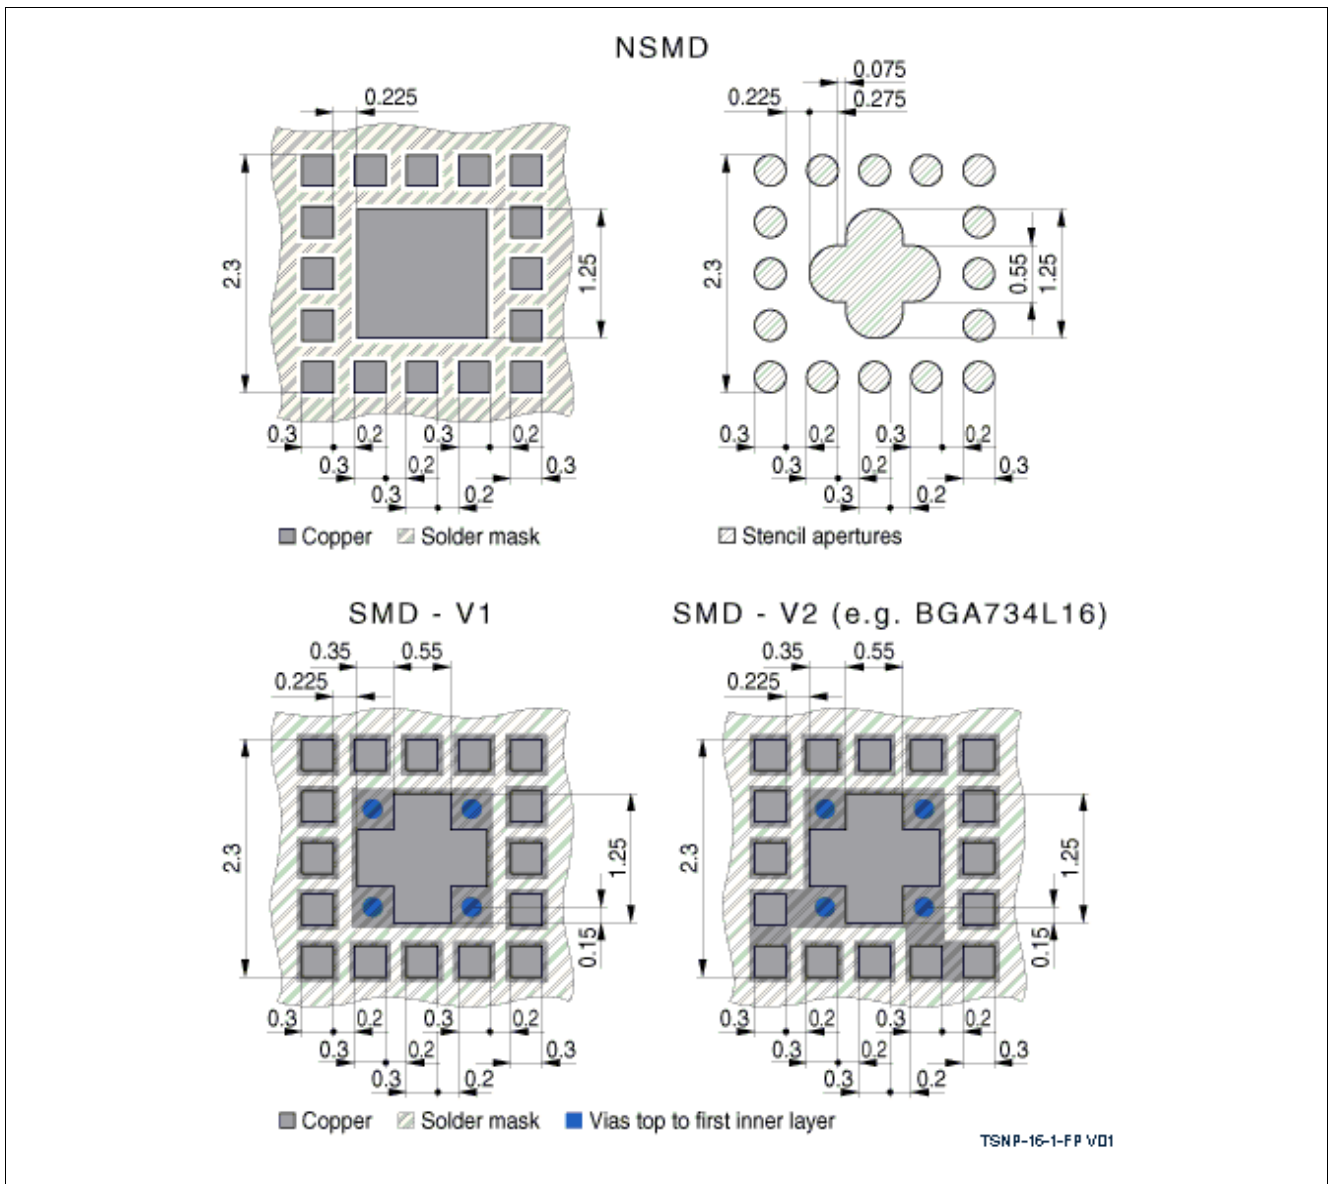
Recommended footprint and stencil layout for the TSNP-16-1 package
